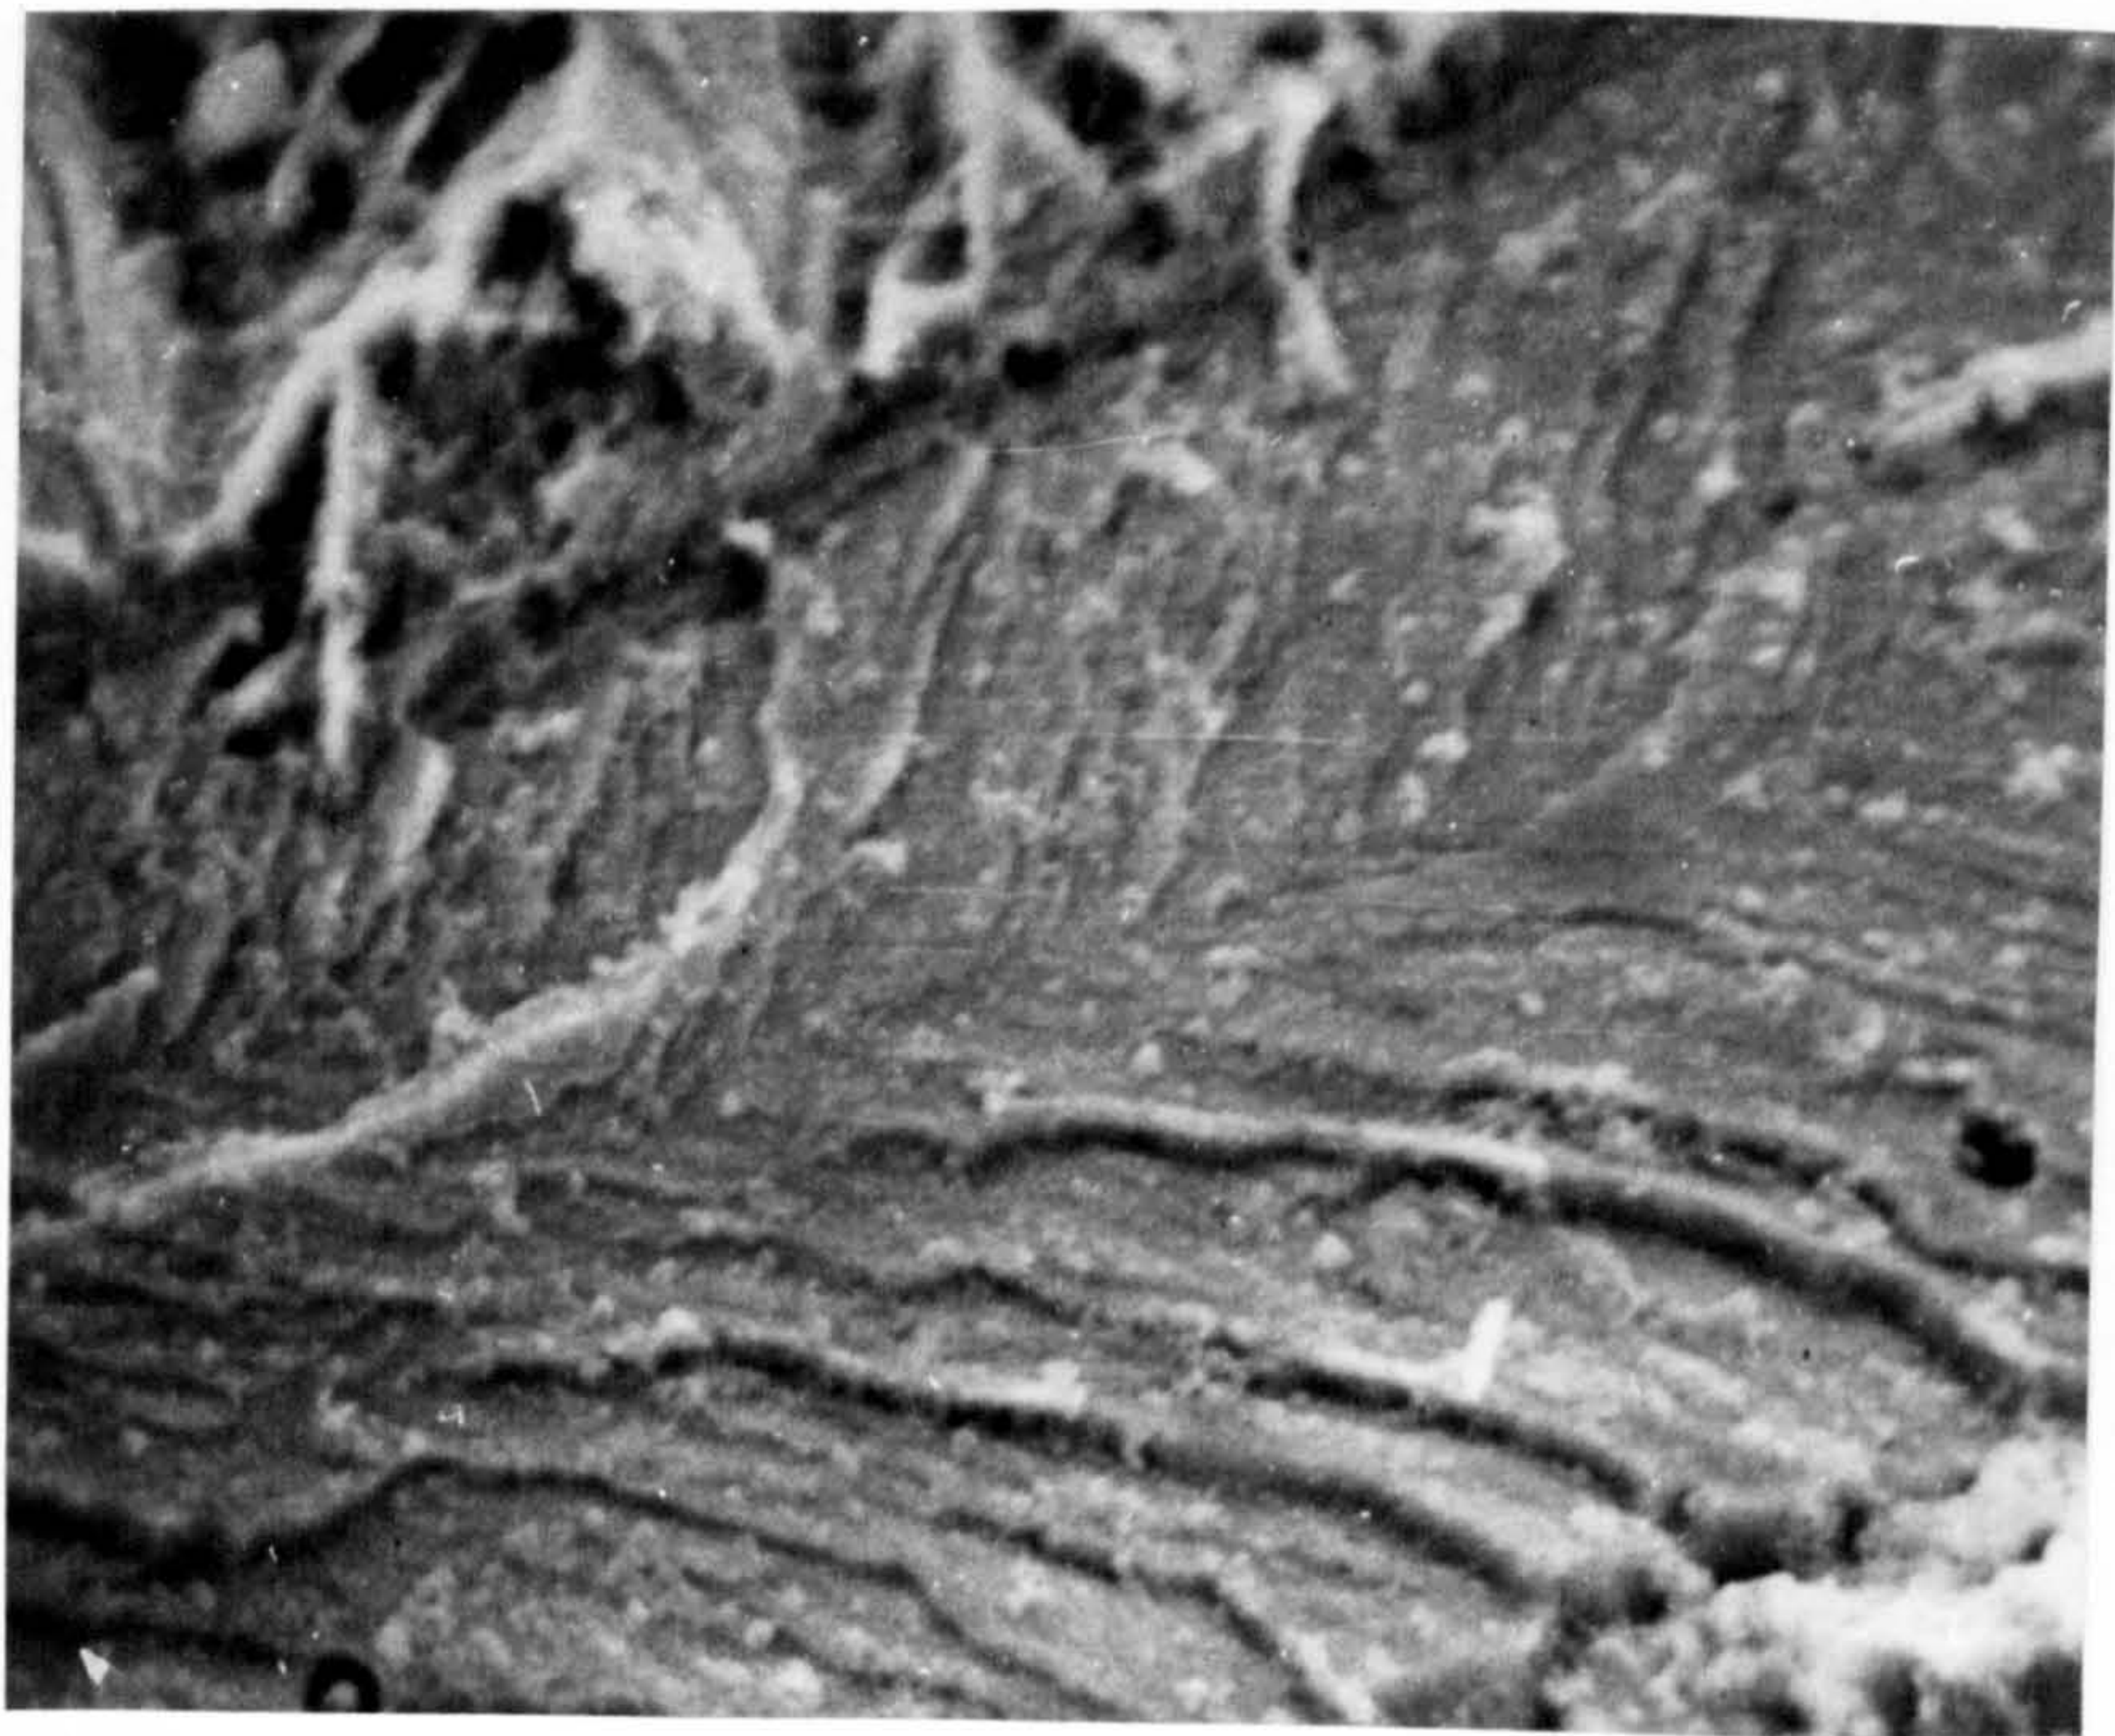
Fracture surface showing chevron markings (2,320x).
